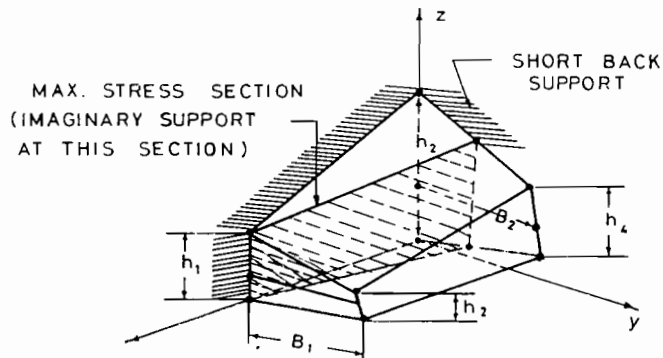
Maximum stress section in a bevel gear tooth with short back support.
